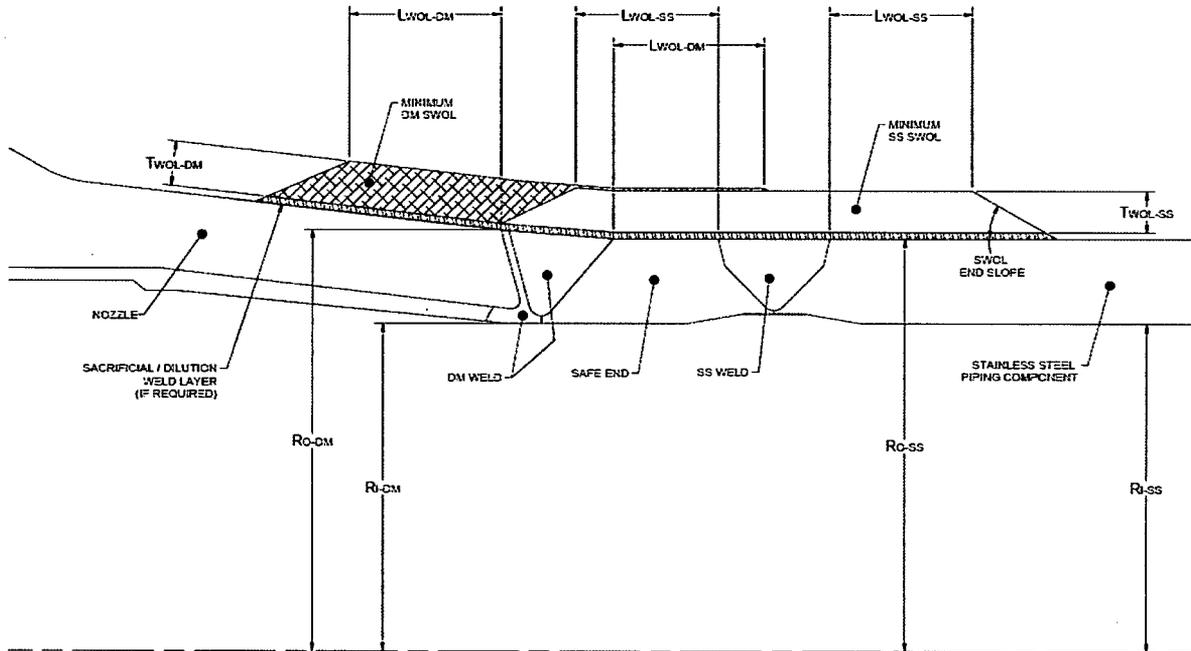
Weld Overlay Design Parameters for the RCS Surge Nozzle
